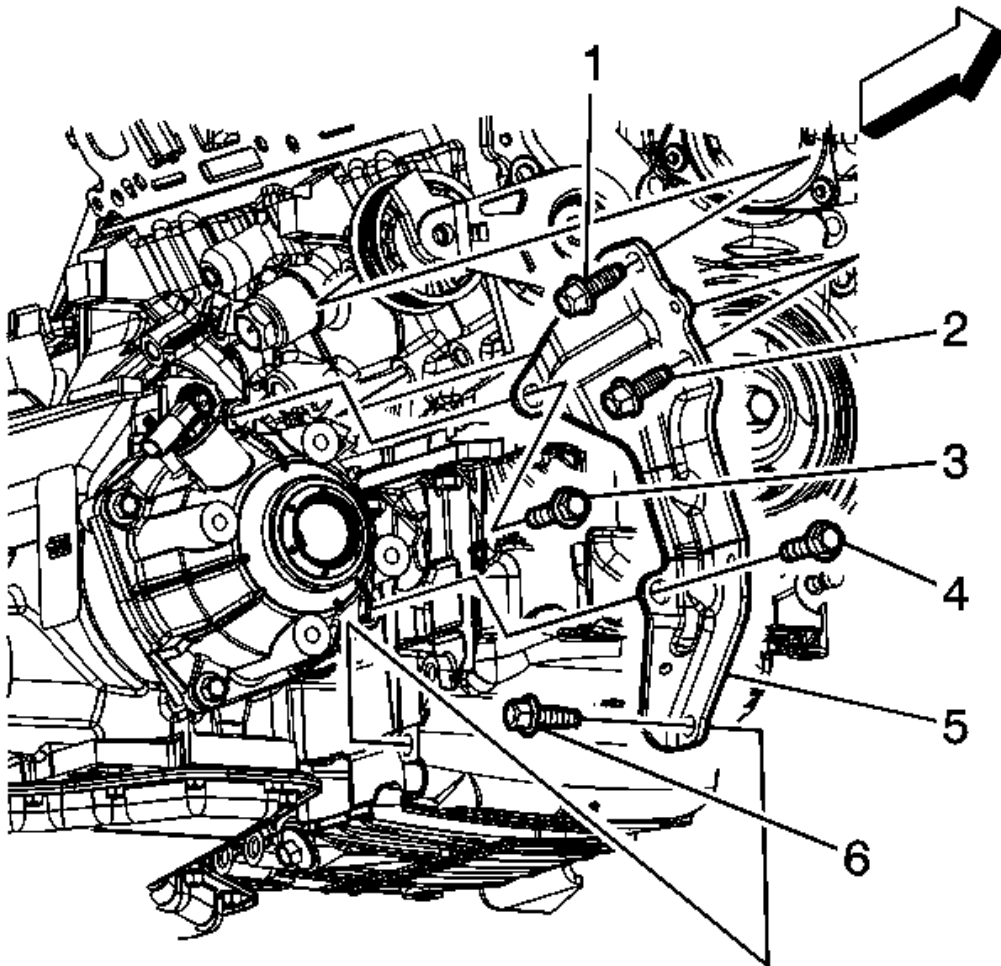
Transaxle Brace-To-Oil Pan Lower Bolt
